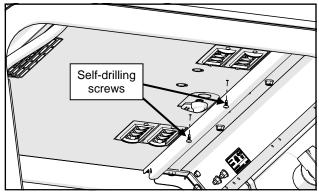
(Secure A/C Unit to Roof Pan)
